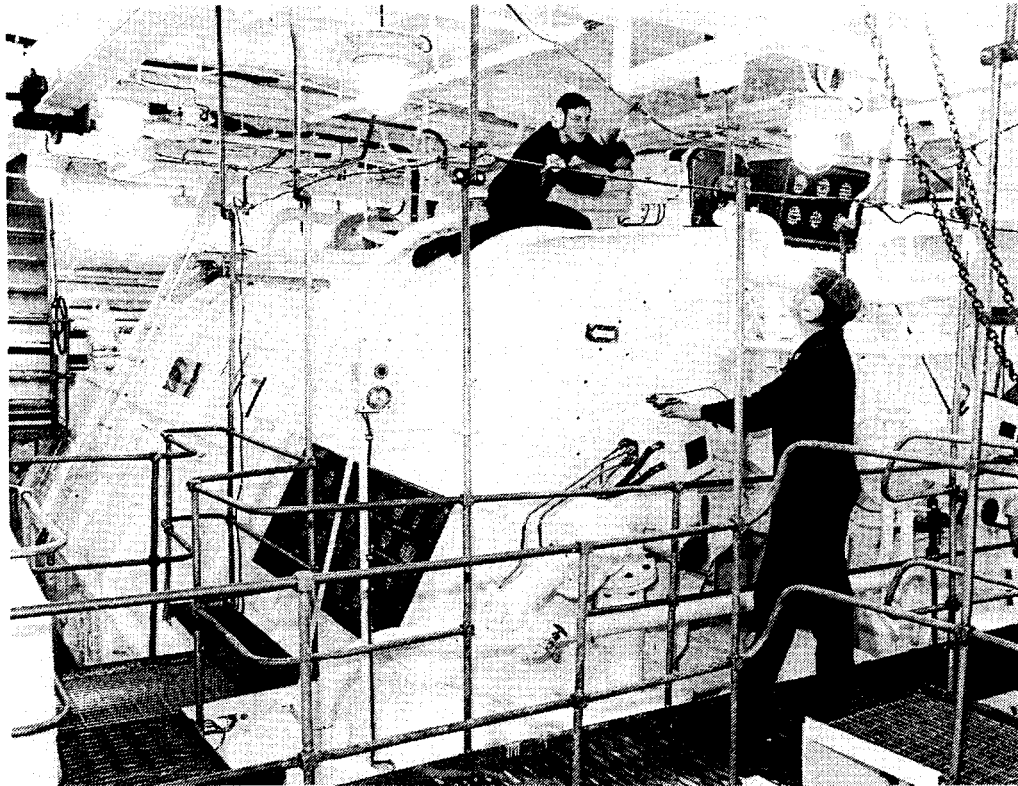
THE FINISHED ARTICLE. THE REBUILT STARBOARD GEARBOX DURING PRE-SEA CHECKS
